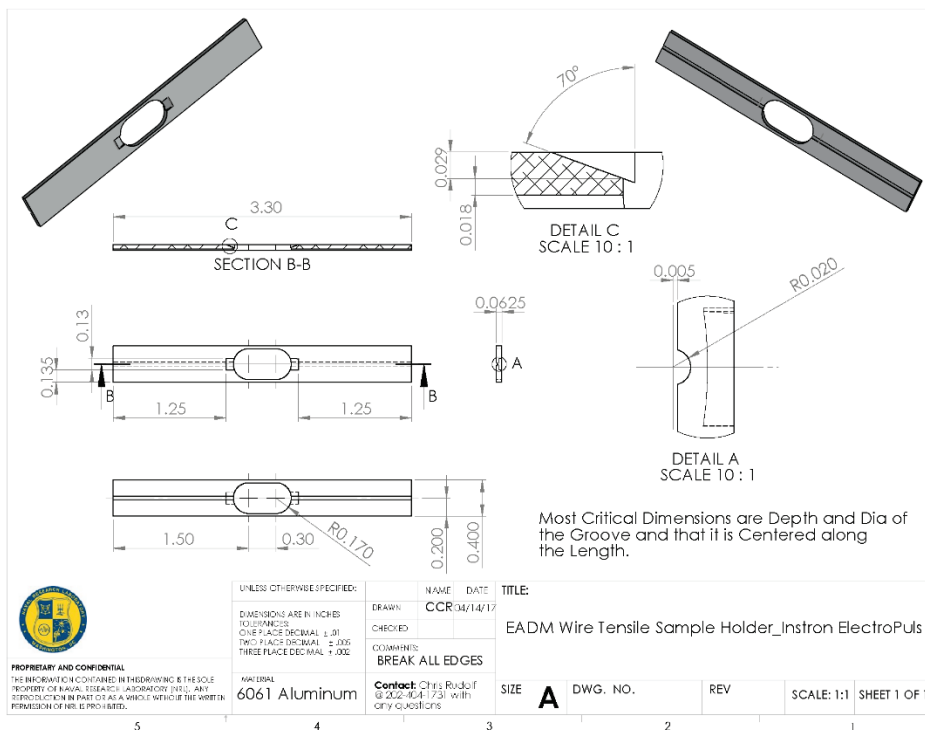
Machining drawing for specimen tabs with a larger gage-section and wedge-grip contact regions. The smaller SEMTester tabs were actually used in all of the Instron ElectroPuls baseline temperature response tests.
